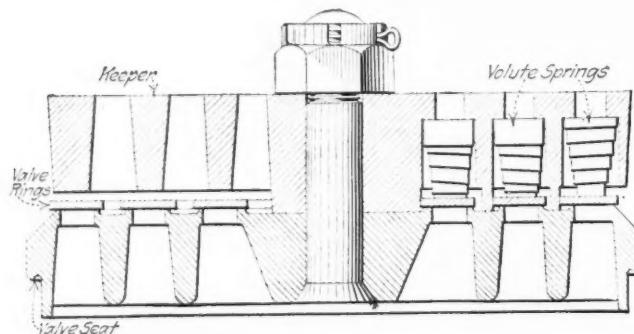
"SIMPLATE" DISCHARGE VALVE
